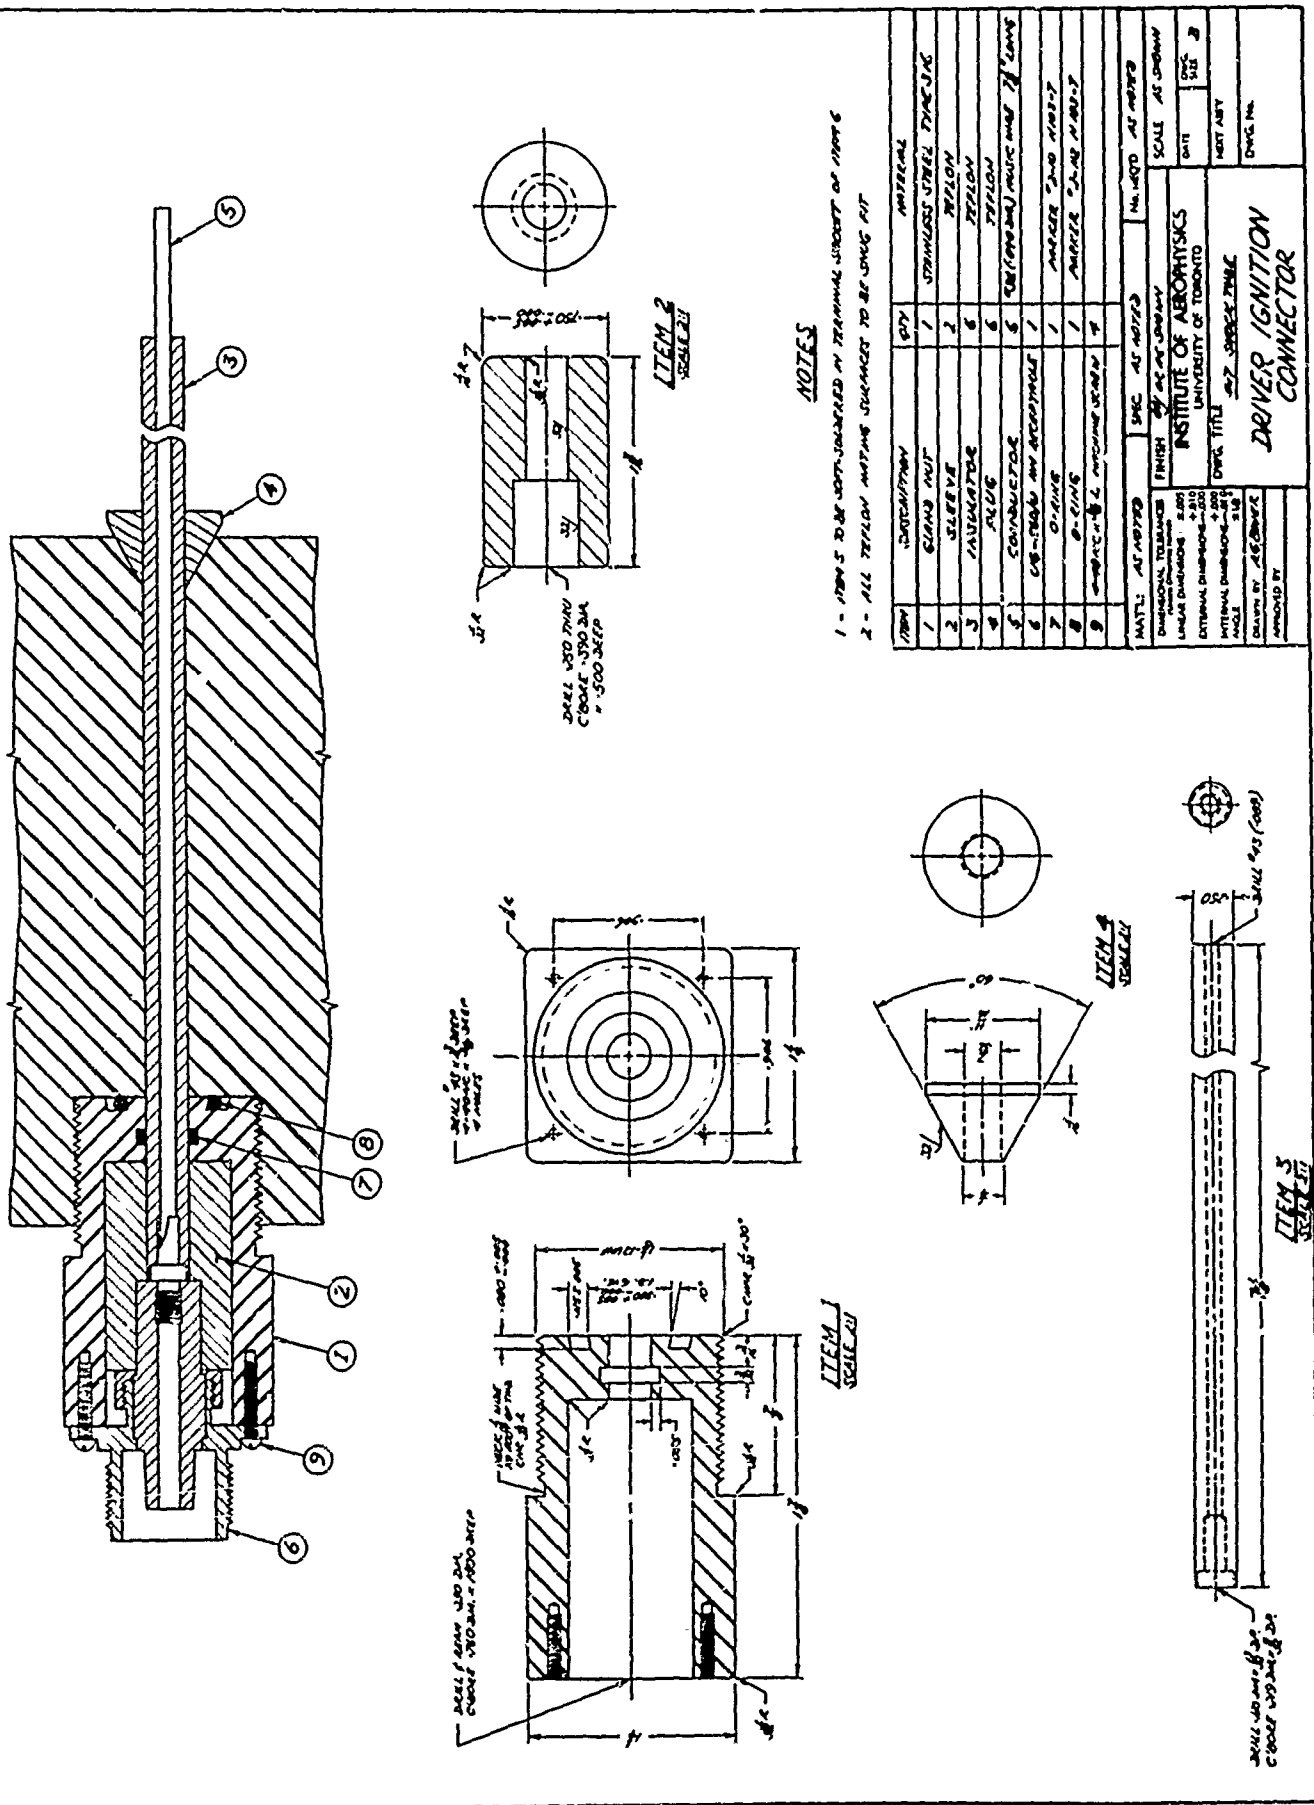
DESIGN OF DRIVER IGNITION CONNECTOR
